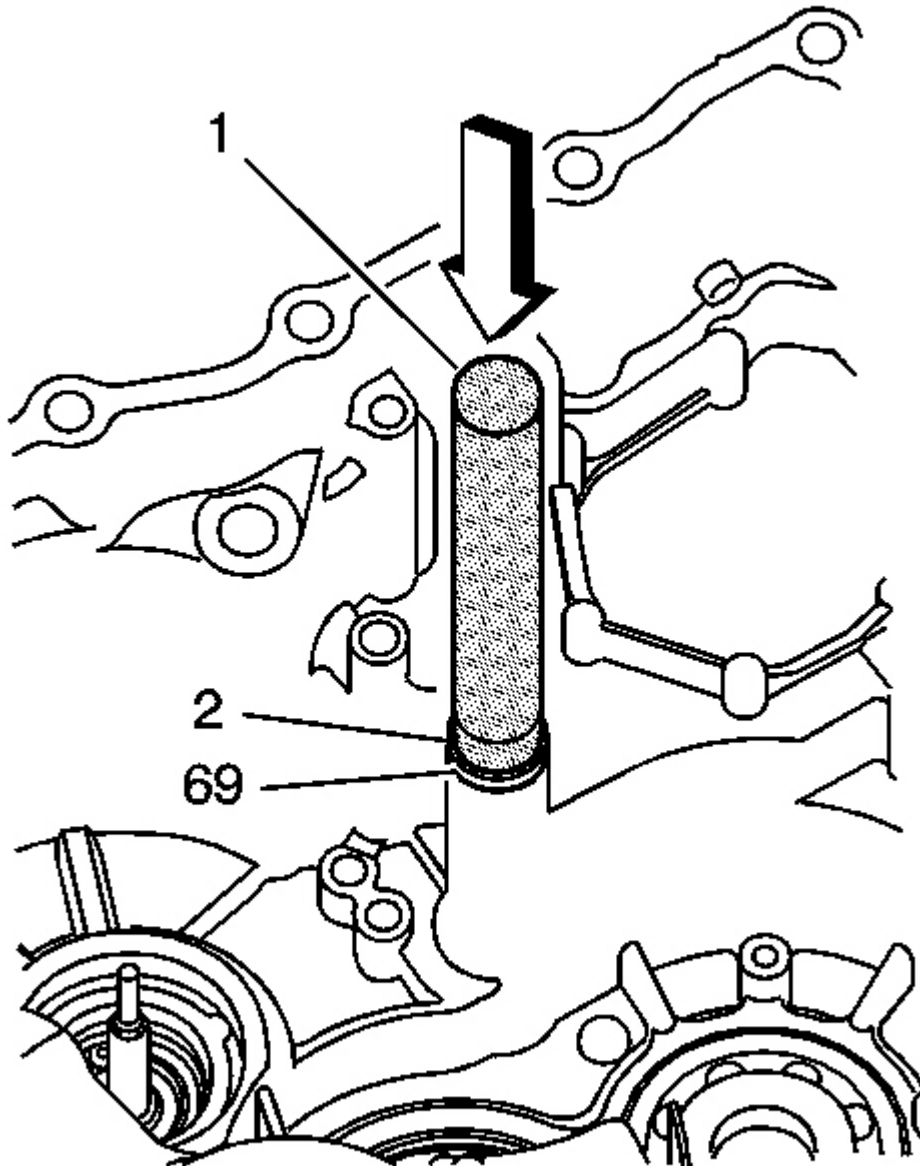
DT 46516, EN 46342 & Park Pawl Actuator Bearing
